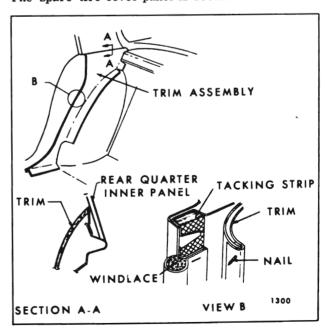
Rear Quarter Lower Trim Assembly "B & C" Body "39 and 69" Styles
